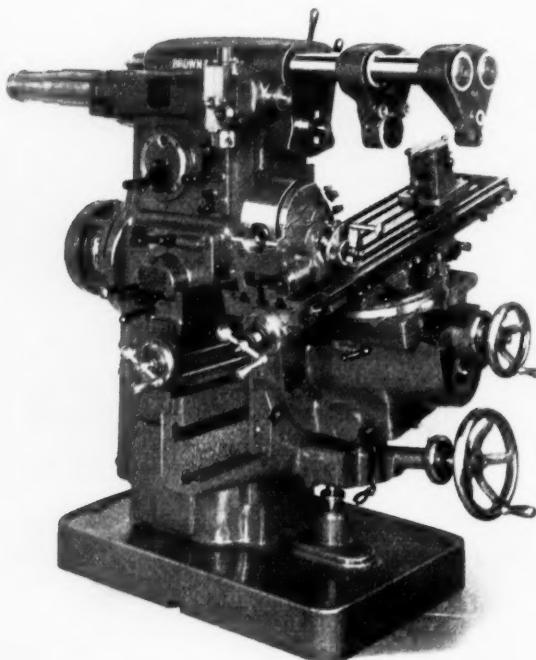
B & S "Omniversal" Milling Machine with Extra Milling Head
